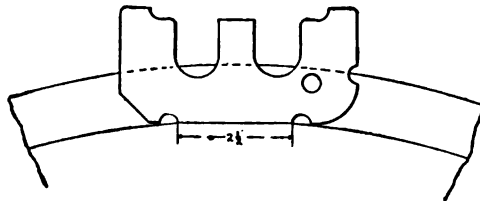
Wheel Defect and Worn Coupler Limit Gauge.
